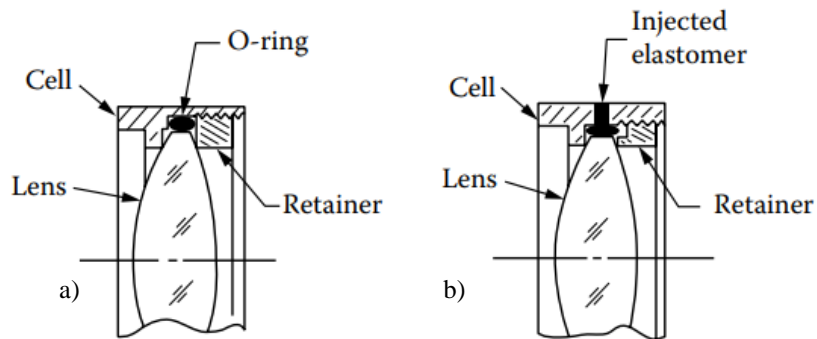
a) O-ring sealing technique. b) Elastomer sealing technique [52].
